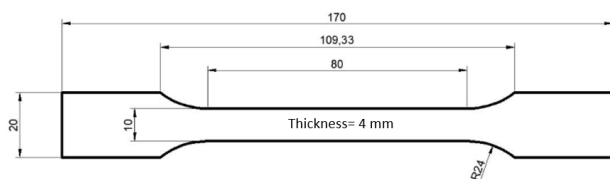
Tensile test sample dimensions in ISO-527-2-type-1A standard [32]
